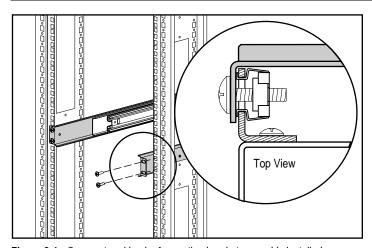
Cage nut and back of mounting bracket assembly installed
